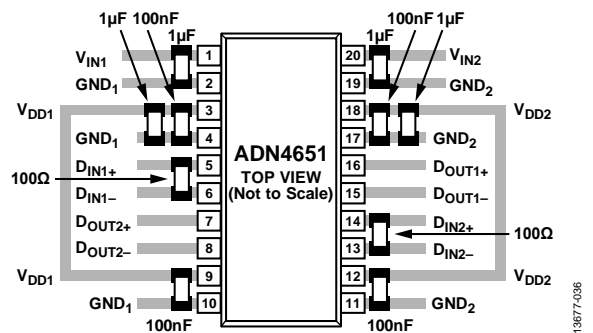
Required PCB Layout When Using the LDO (3.3 V Supply)
